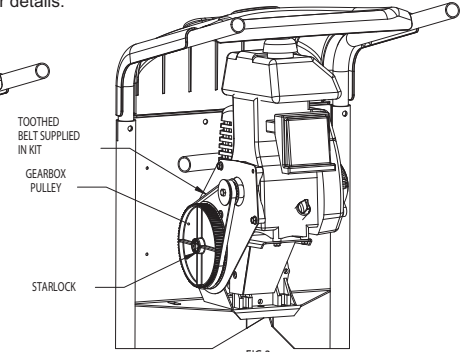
FITTING GEARBOX BOTTOM PULLEY AND SECURING WITH STARLOCK WASHER.
